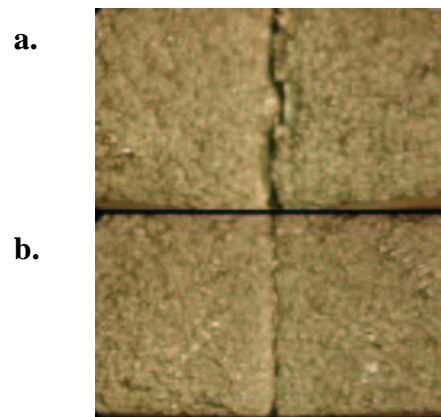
Fracture surface of Sn-Pb at 100°C (a) and at -75°C (b).
